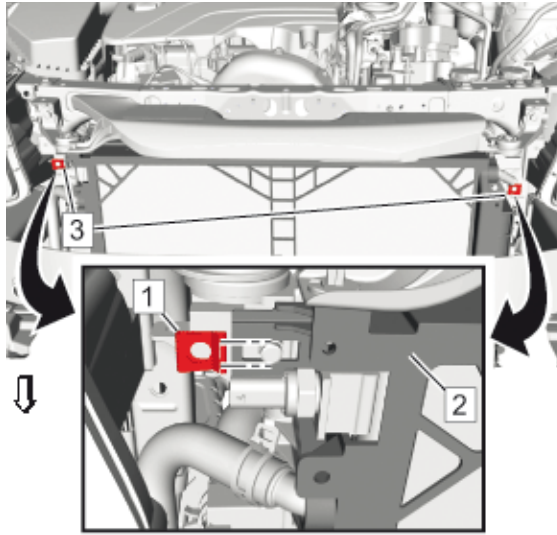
Air Conditioning Condenser Bracket Spring And Radiator Assembly
